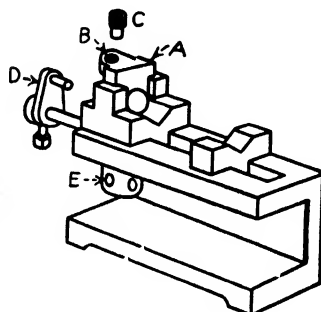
Jig for drilling cross holes in round bar stock. Clamping slide *A* carries fixed bushing *B* and slip bushing *C*. Stock is located by stop *D*. Nut *E* locks slide in any position.
